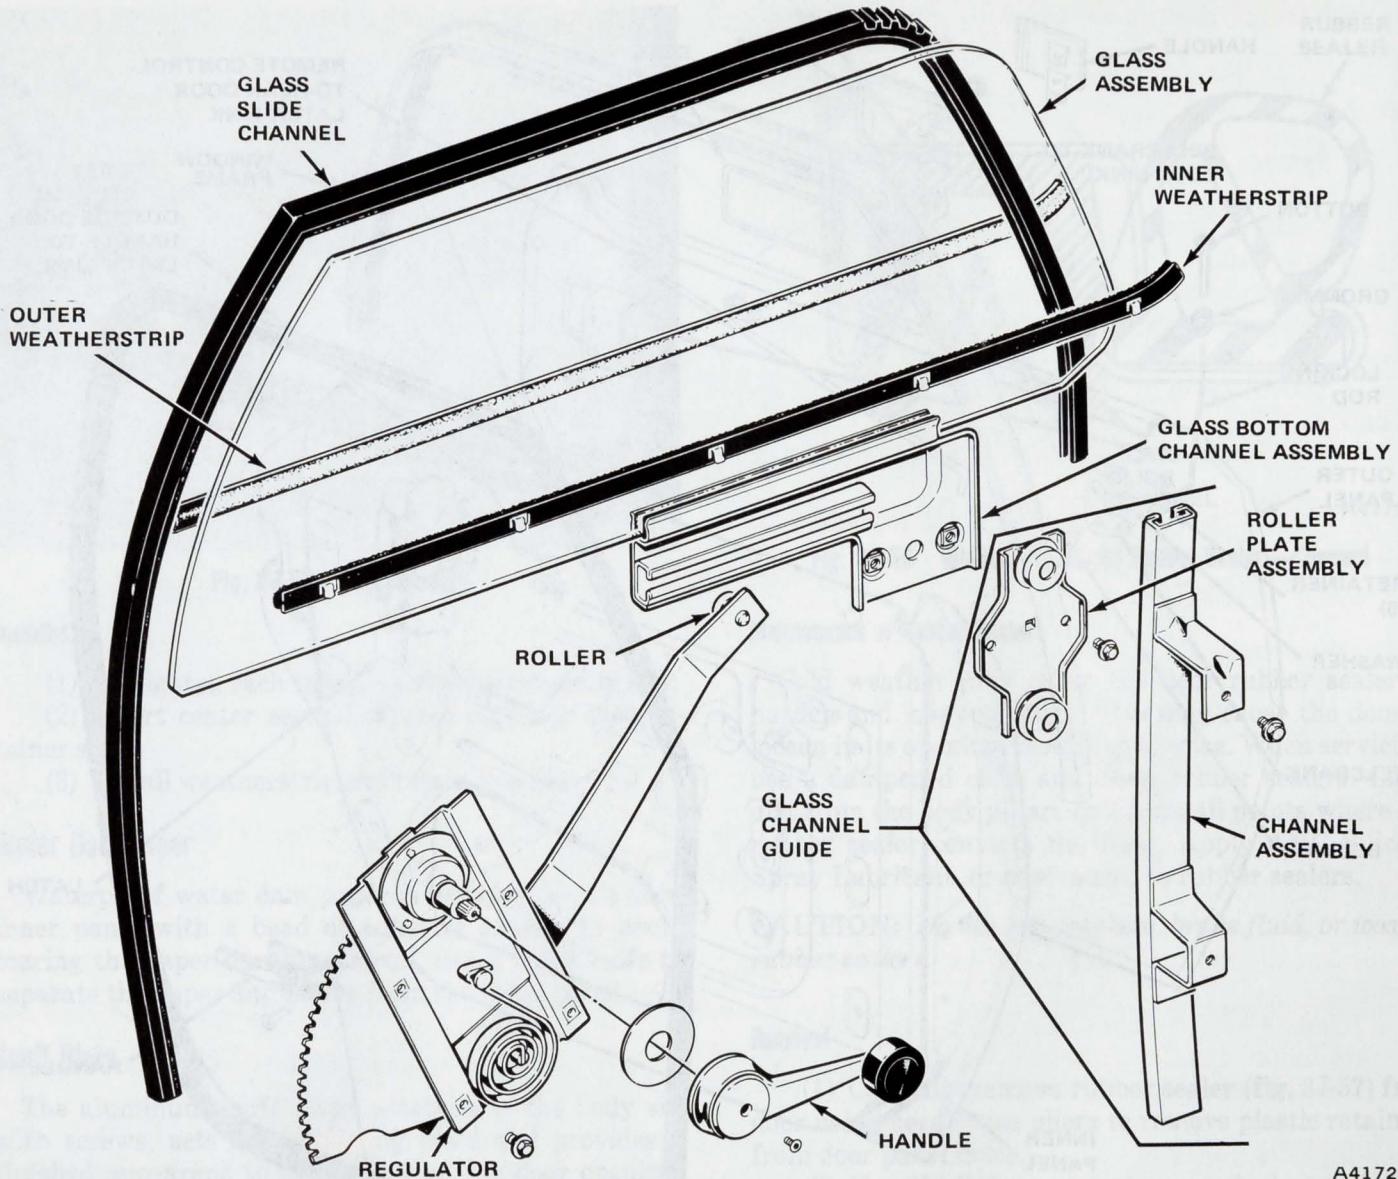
J-58 Door Glass and Attaching Parts—Concord
